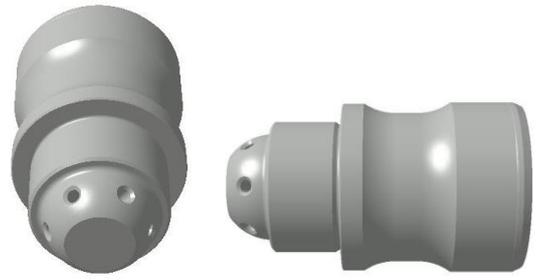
6-hole prechamber, 6.0cm³ (8000270) for premium spark-plug sleeve
